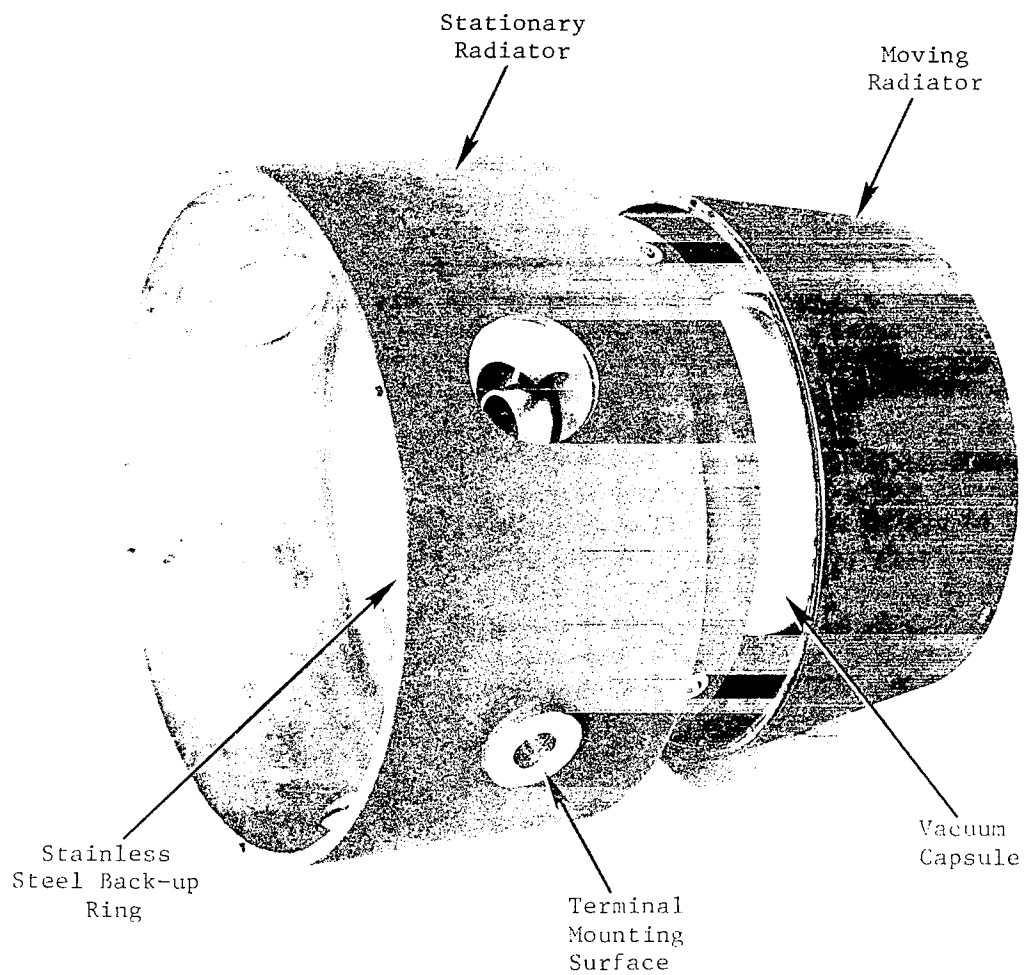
AC Breaker Contact (Vacuum) Capsule with Radiators Attached and Before Evacuation and Seal-Off.
